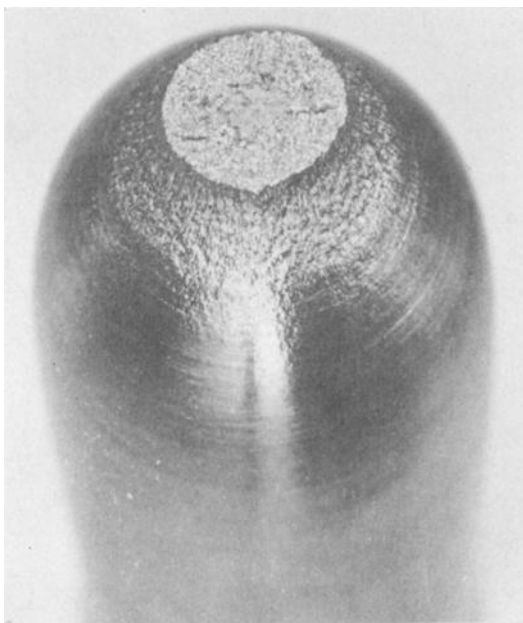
Light fractograph of Fe-30Cr-2Mo alloy: fracture surface of Bridgman-type specimen (radius at neck is 8 mm and minimum longitudinal radius of curvature at neck is 4.5 mm). It shows typical bimodal fracture.
